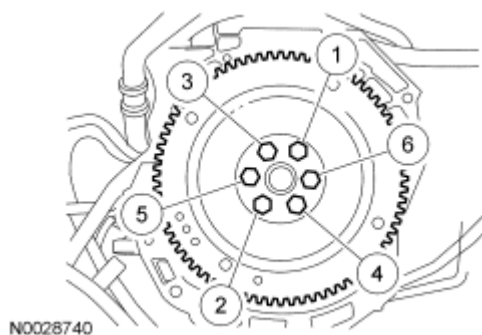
Identifying Flexplate Bolts Tightening Sequence
